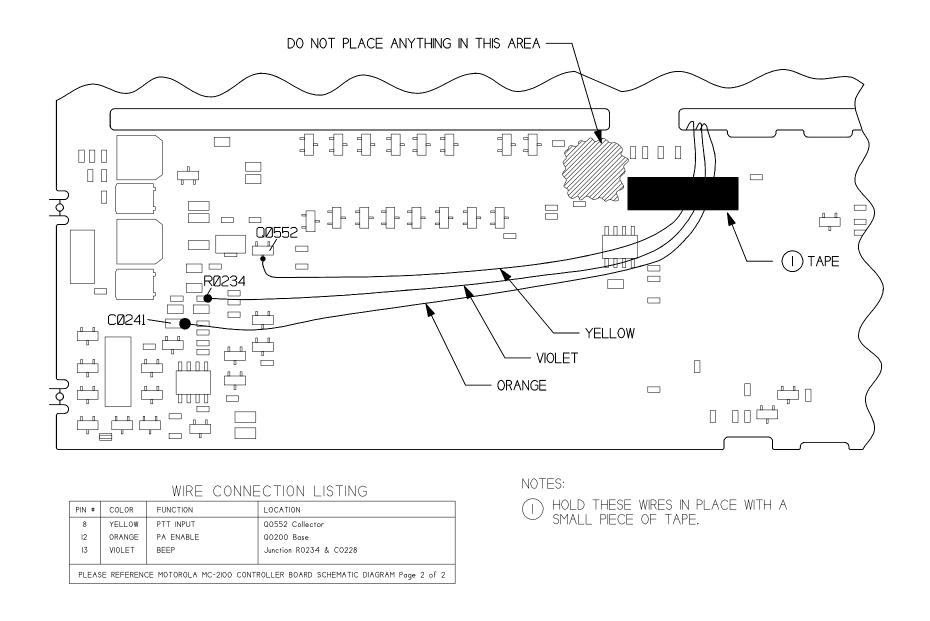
Motorola MC-2100 Main Board (Side 2)
